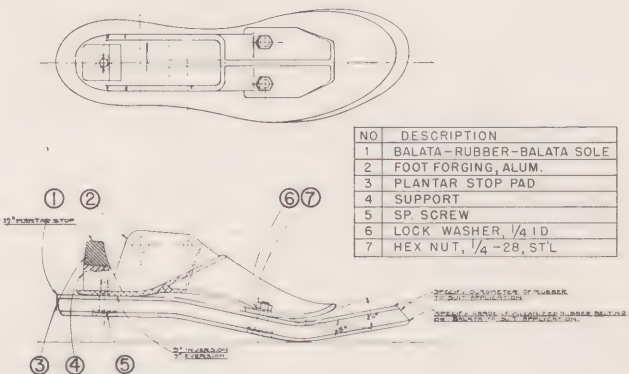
Assembly drawing of a functional foot showing the ankle piece, the heel cushion and the plantar rubber sandwich.
